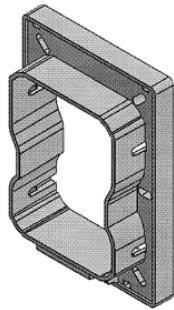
Architectural* Level Top and Bottom Rail Bracket
